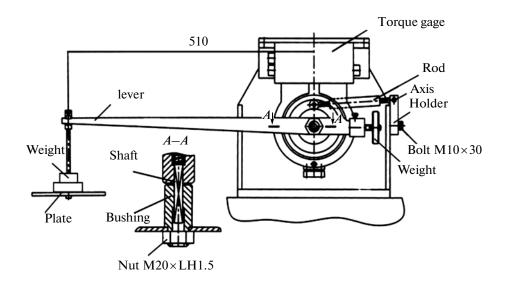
Schematic of calibration of friction torque measuring system of SI-03M test machine.
